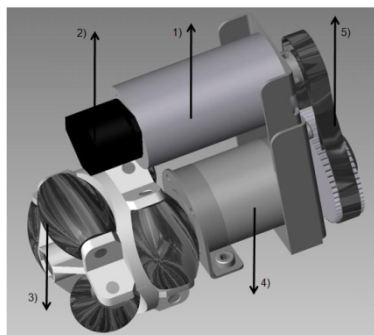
Drive unit with motor (1), encoder (2), omni-directional wheel (3)
